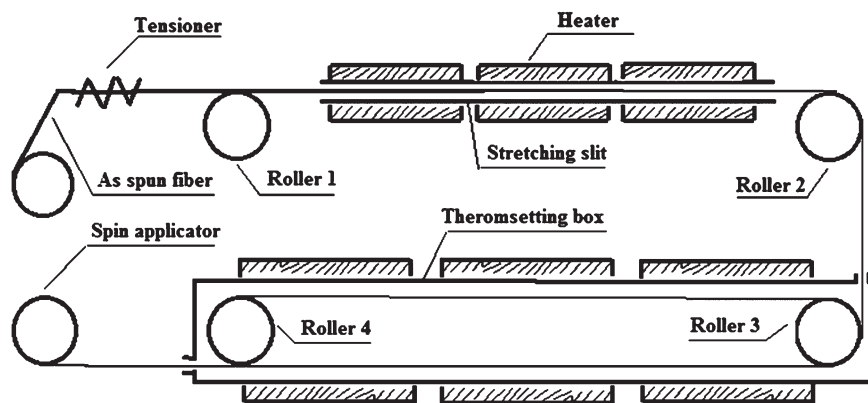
The equipment diagram of hot drawing machine and hot setting machine.
